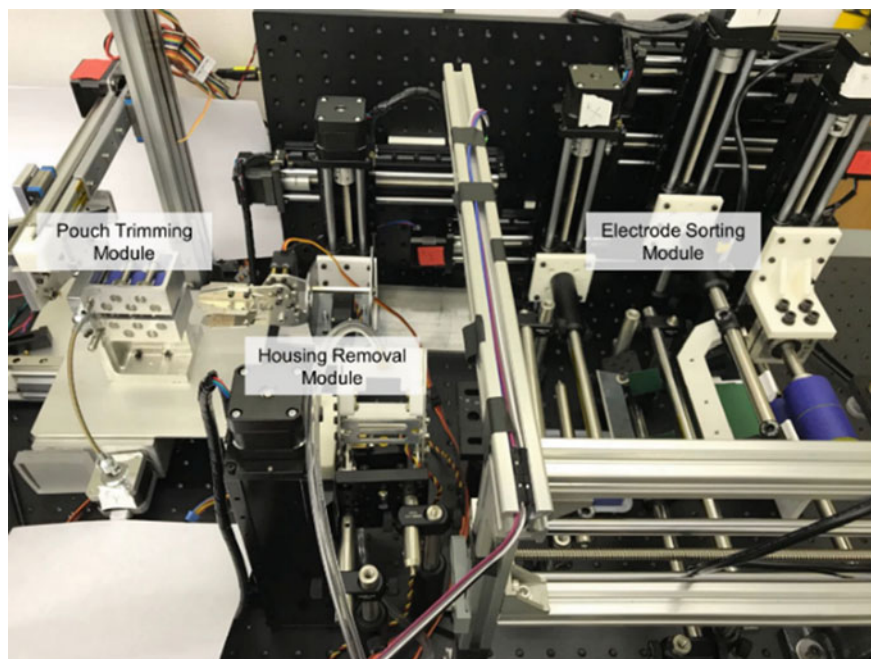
Prototyped LIB pouch cell disassembly system overview [14]
